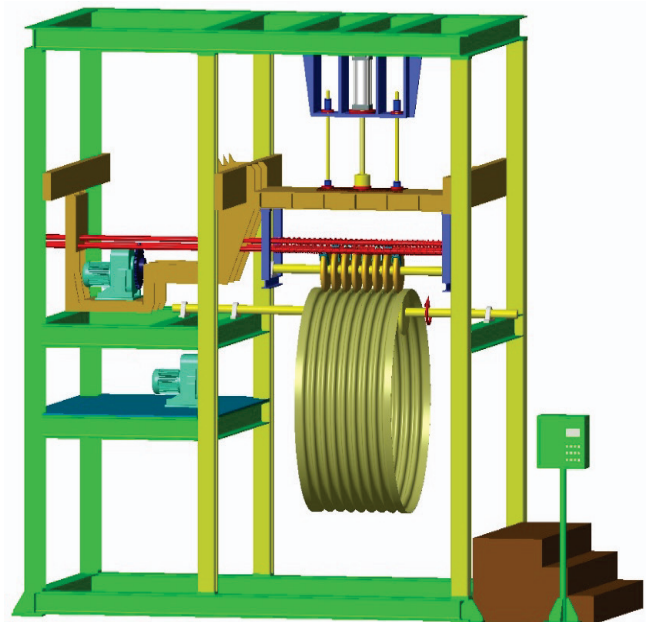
3D schematic diagram of multiple low-die and upper-die roll molds on a rotating shaft
